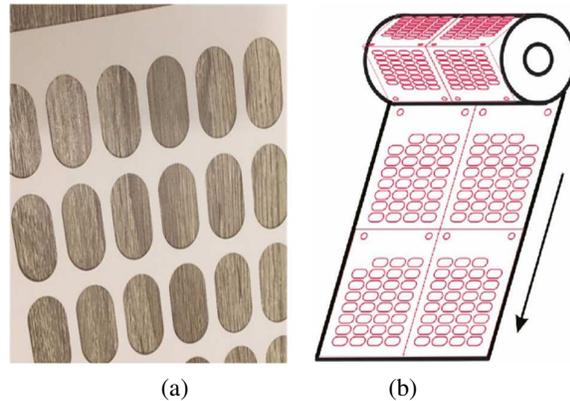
Final product: (a) cardboard sample with layered composition and (b) sketch of a finished roll [5]
